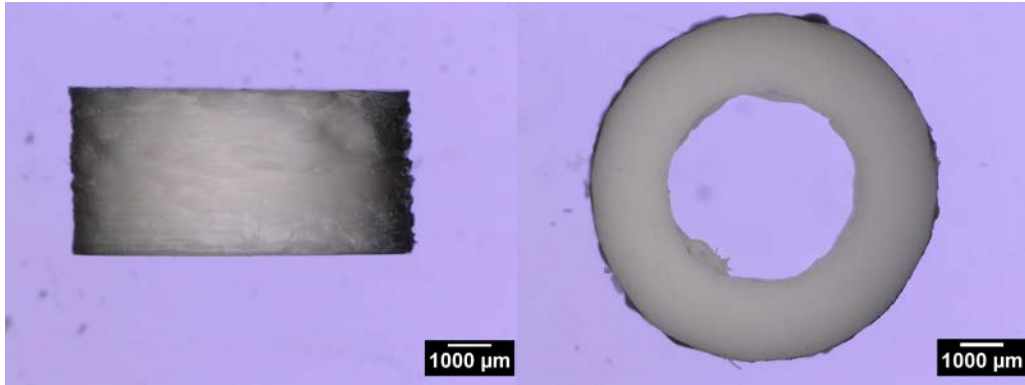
Side view and top view of an alumina ring structure printed with A16 alumina after sintering.
